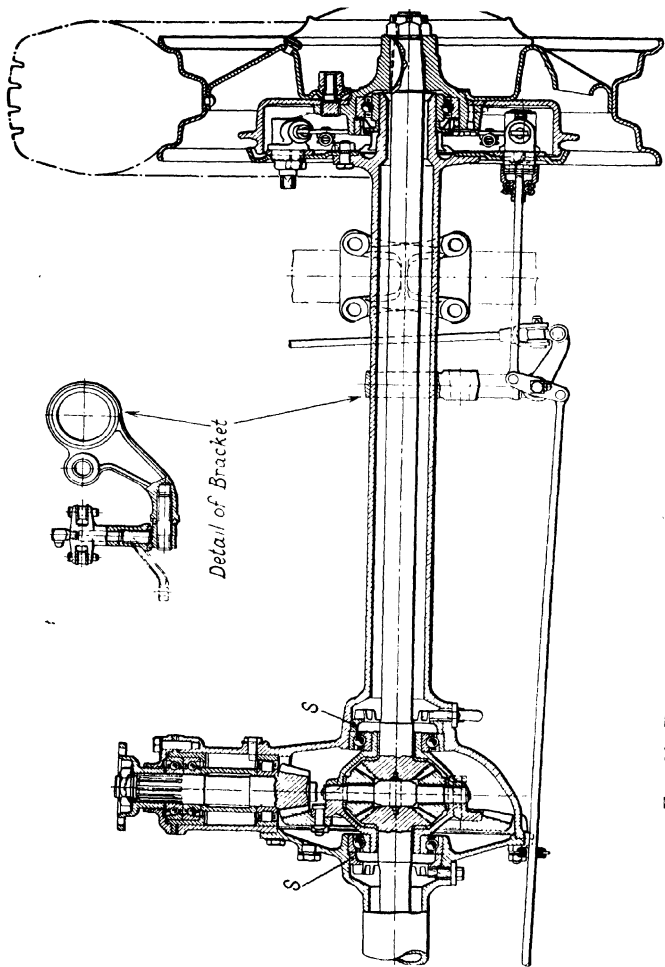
THREE-QUARTER FLOATING REAR AXLE OF THE AUSTIN TWELVE
